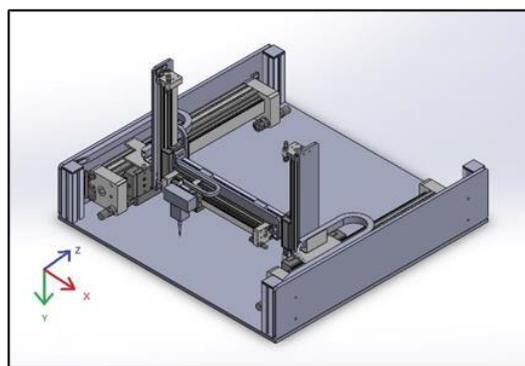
The structure of three dimensional pneumatic sewing machine platform.
